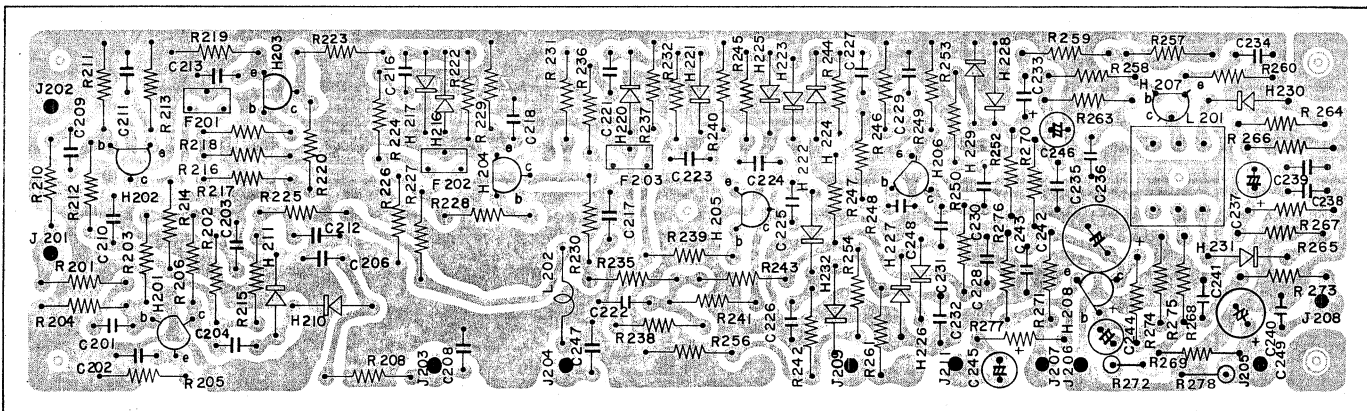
FM IF and Detector Board – P200 Component Assembly Diagram
